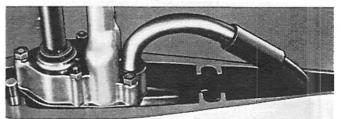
Water Pump Assembly Mounted with Water Lines Installed Section III - Lower Unit
